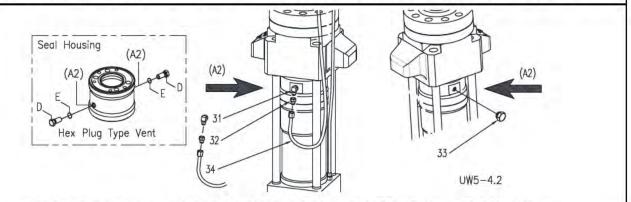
Remove Threaded Vents at (A2). Install Threaded UW Adapter & (A2) Hex Plug
